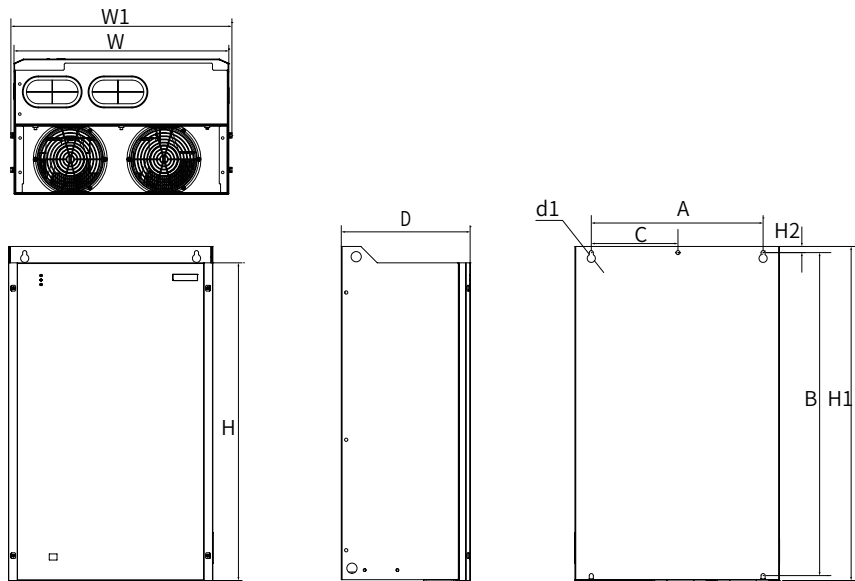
Dimensions of backplate mounting for CP700-4T160-H to CP700-4T200-H models
